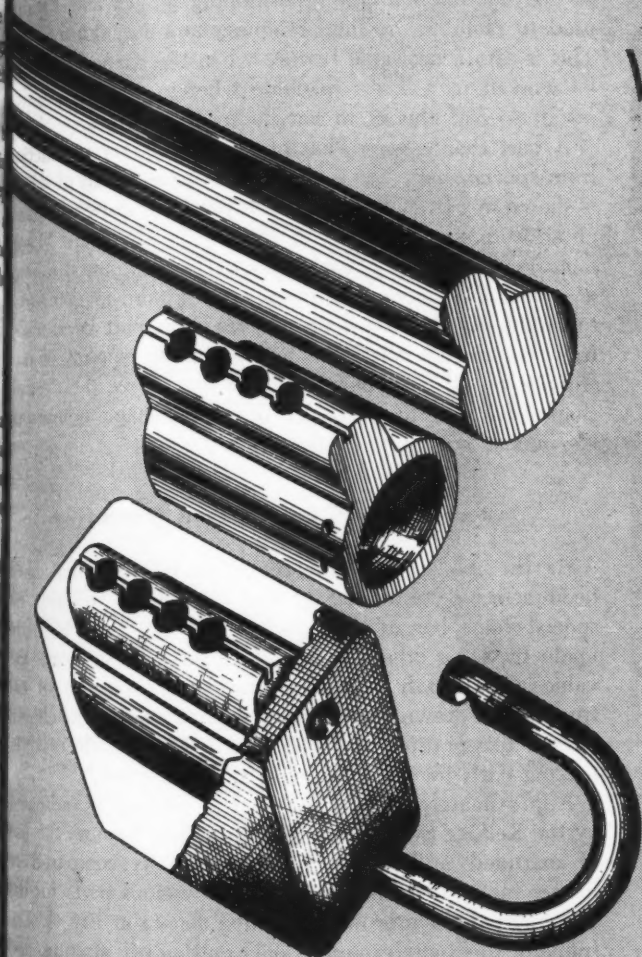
Above — Sleeve of pin tumbler padlock, formerly a casting, now is cut from special-shape bar stock
